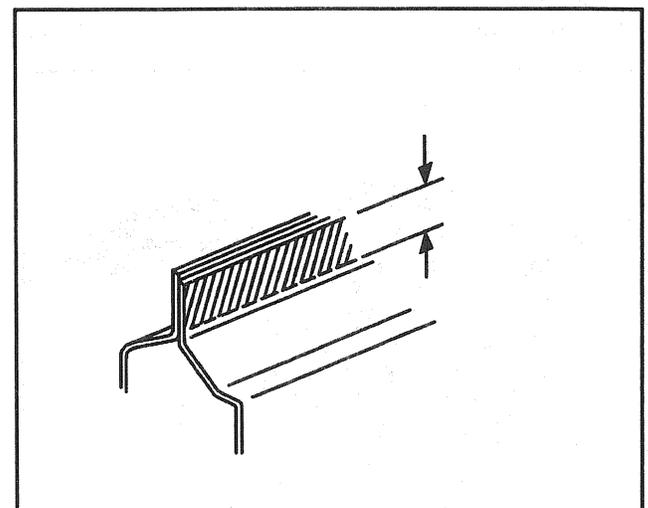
Window Frame Pinchweld for Body Primer
